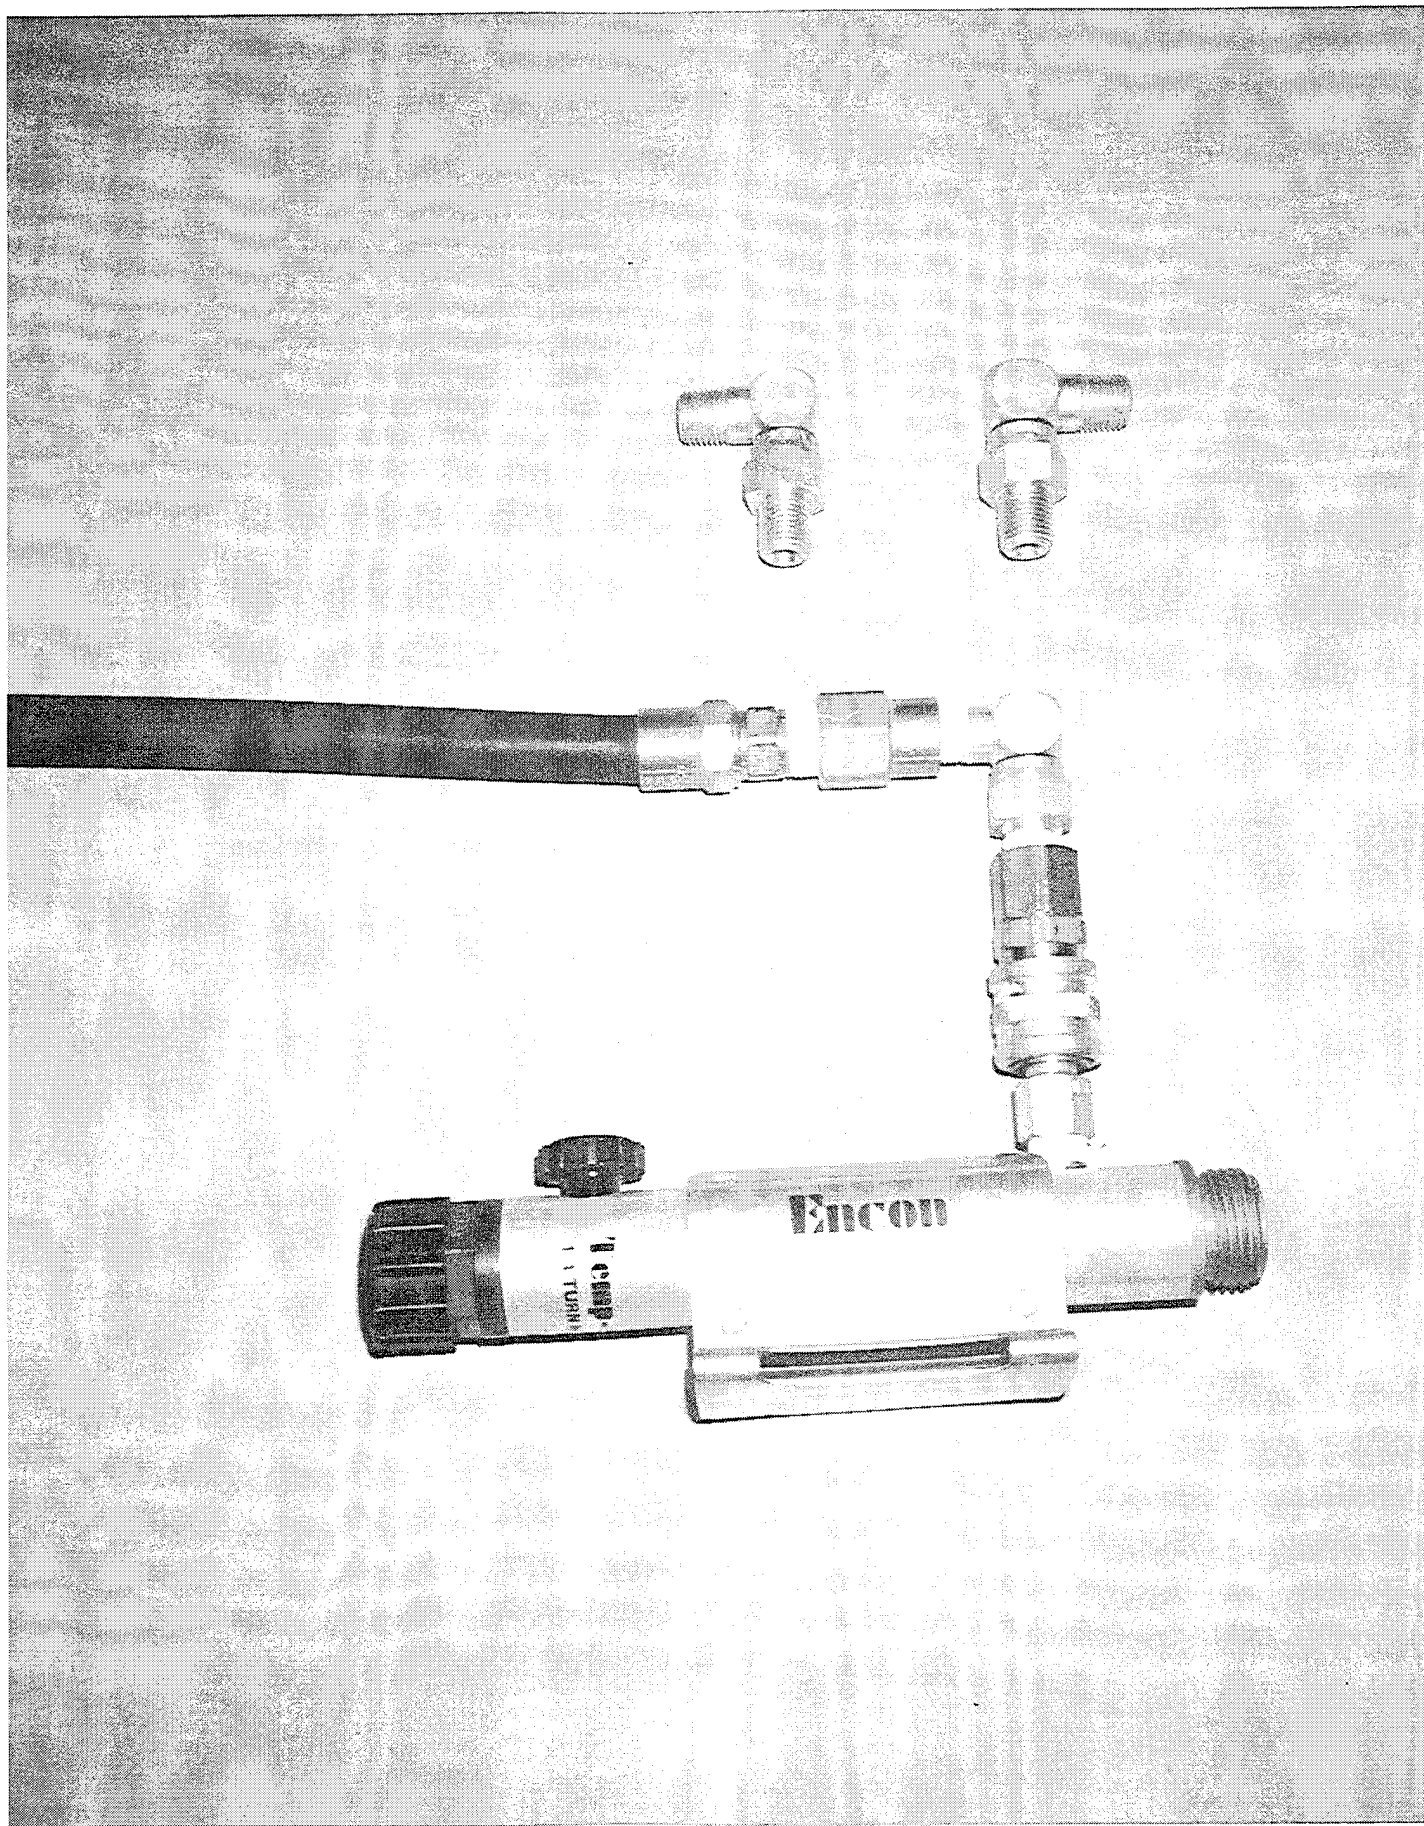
ELBOW CONNECTOR WITH TUBE SIDE ROTATION.
